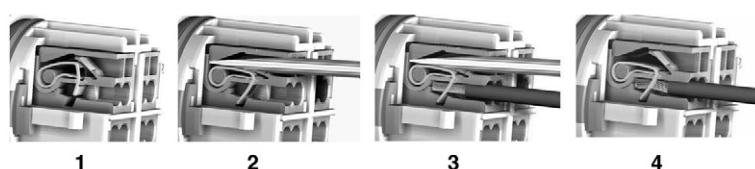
Preparing the cable for indicating lamp type 8013/3.1
